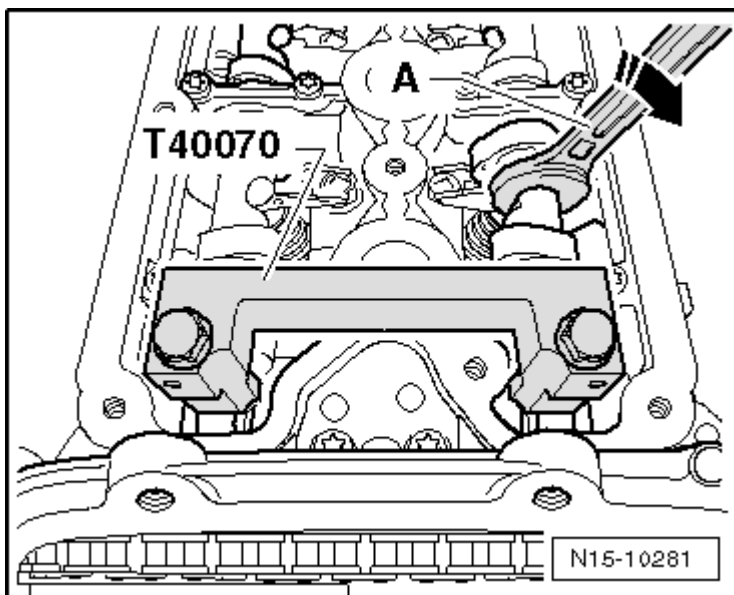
Attempting To Rotate Exhaust Camshaft At Recess Using An Open-End Wrench
